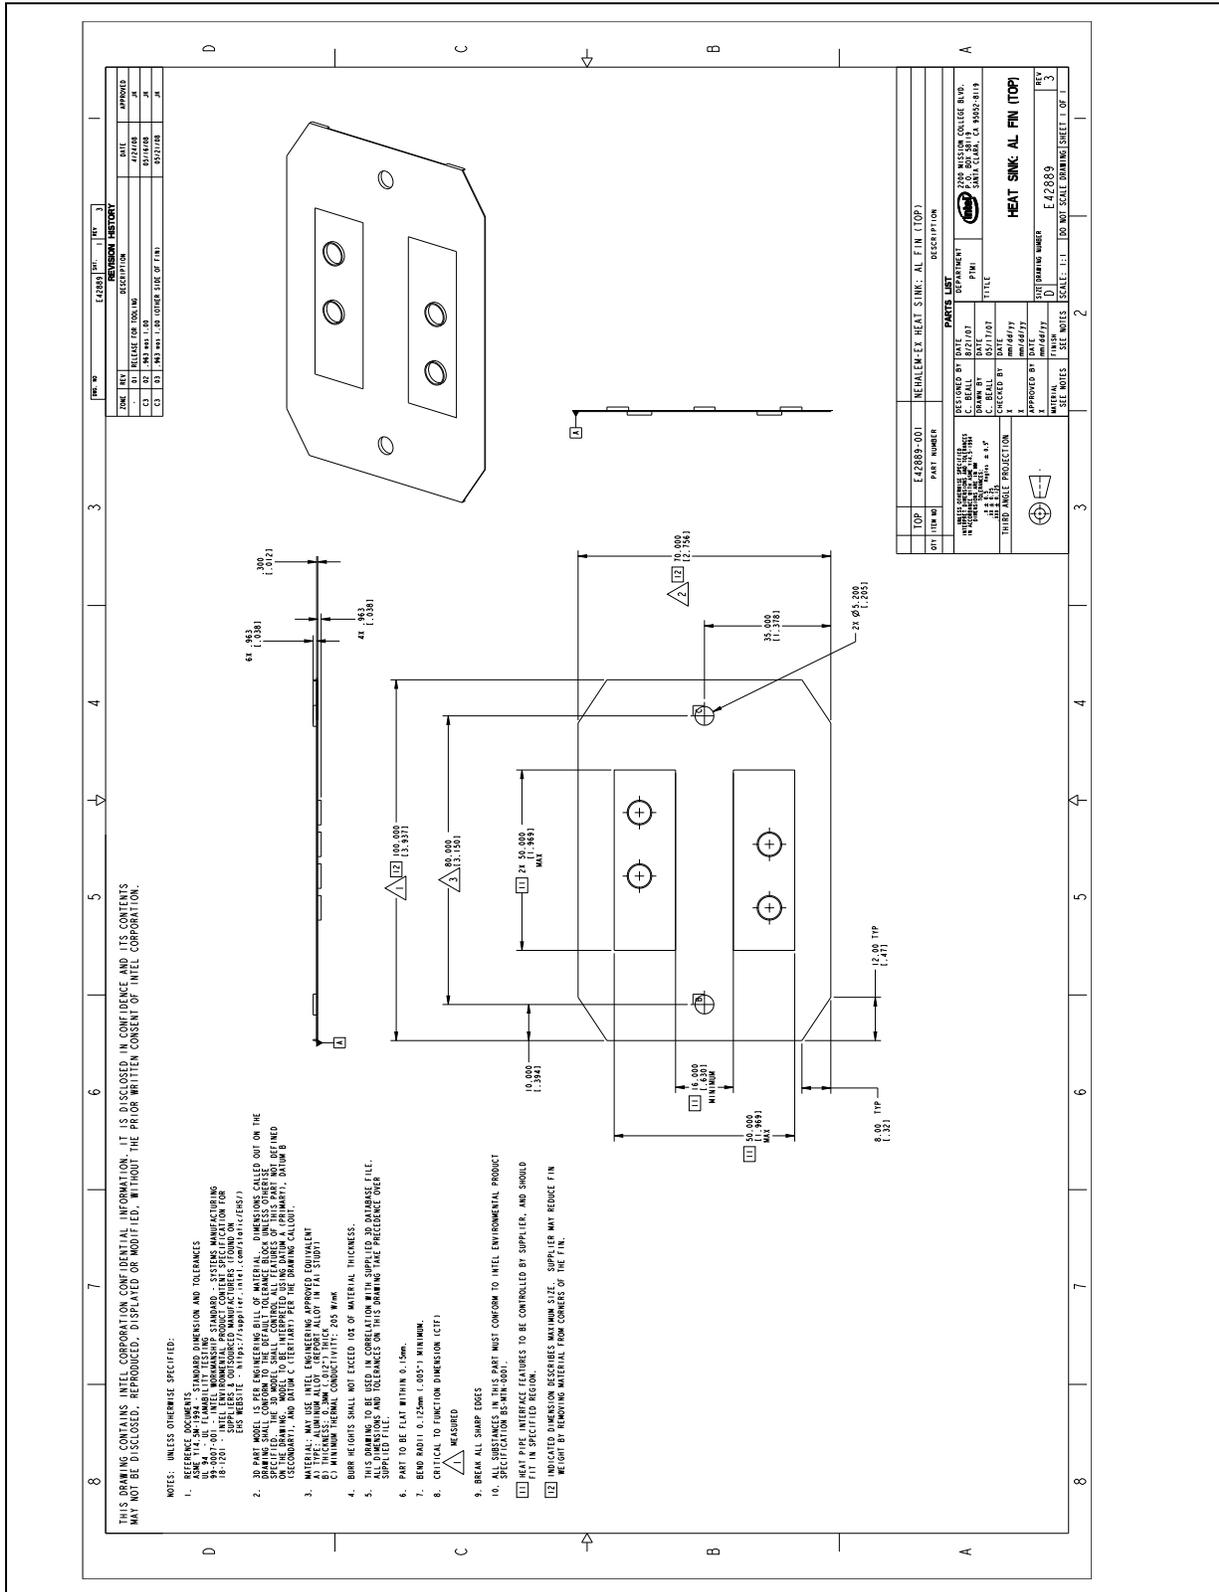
Tower Heatsink Drawing – Sheet 5 of 14
